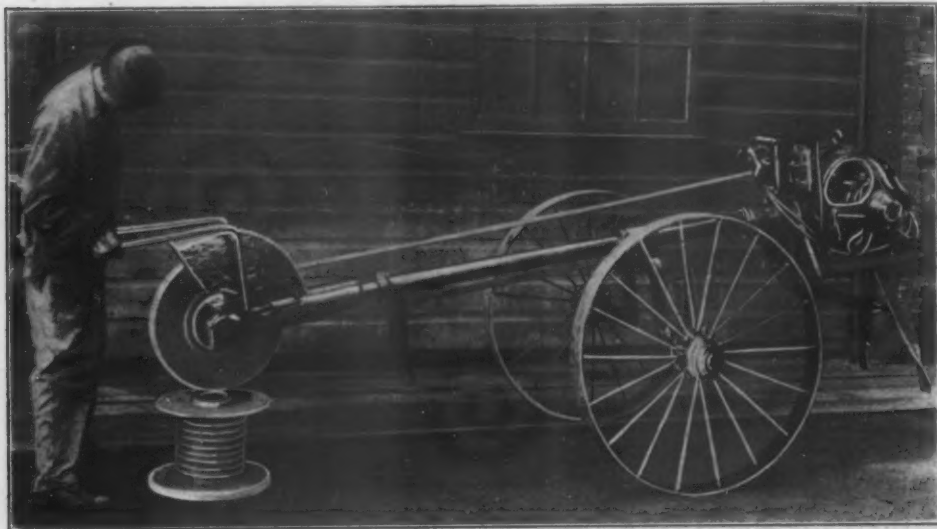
The New Portable Motor-Driven Grinder Built by the Ransom Mfg. Company, Oshkosh, Wis.
